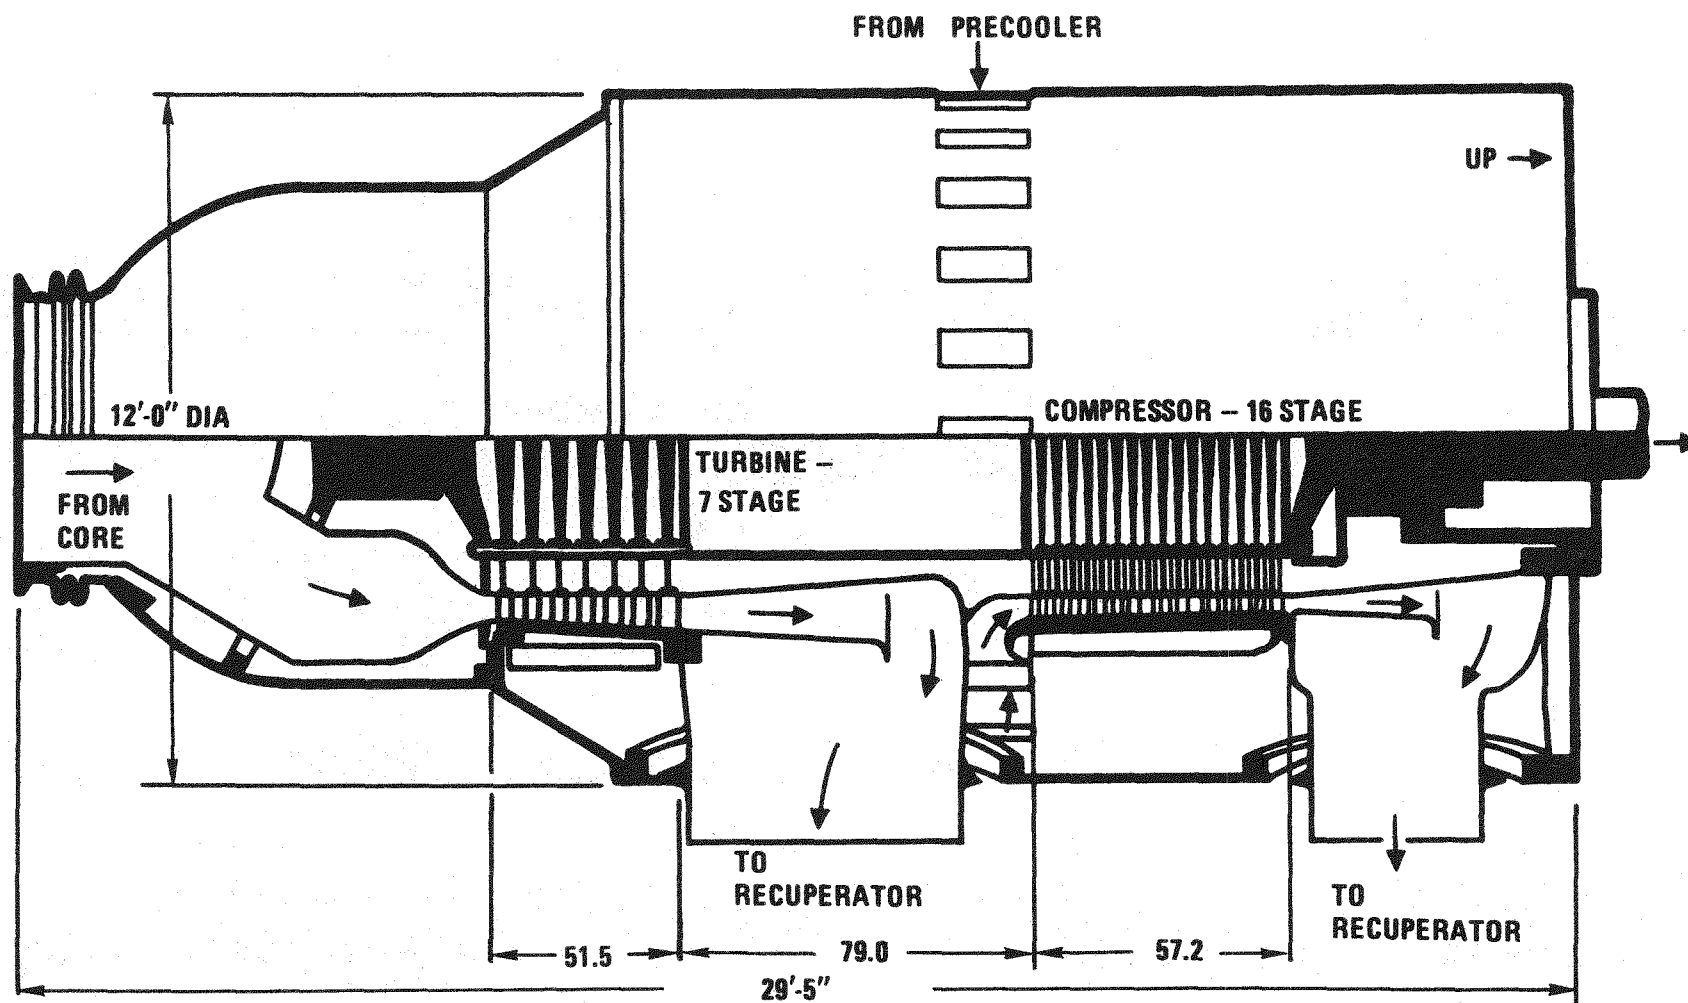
Simplified Cross-Section Showing Single-Shaft Turbomachinery For HTGR Gas Turbine Plant.
